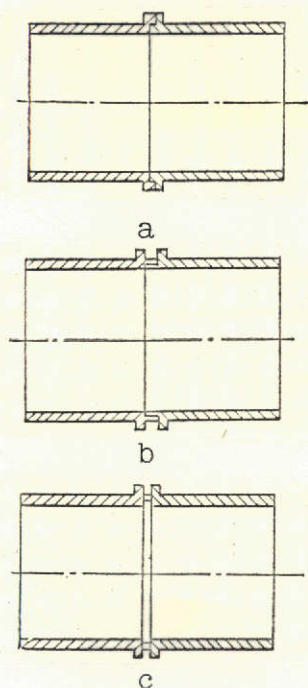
Preparation of specimens for pressure welding (a), flux brazing (b), and diffusion welding (c).
